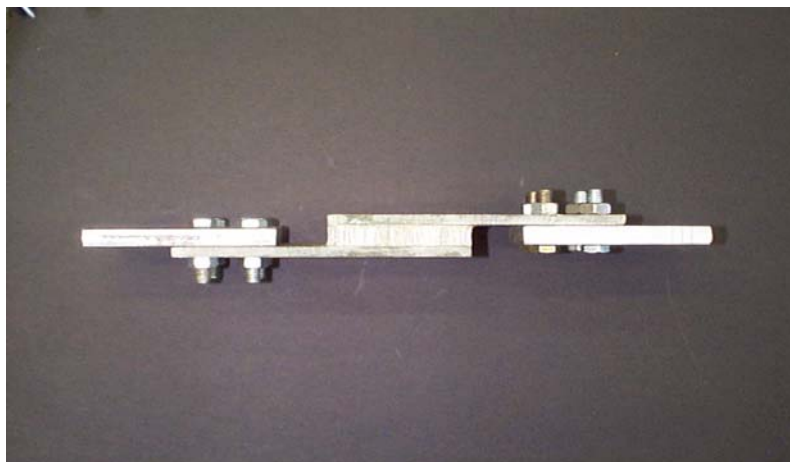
Polymer Honeycomb Test Coupon (Side View)
